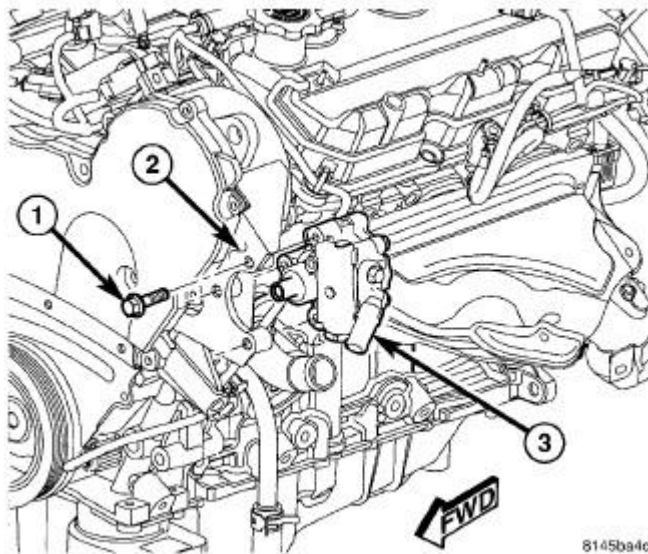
POWER STEERING PUMP - 2.7L/3.5L
